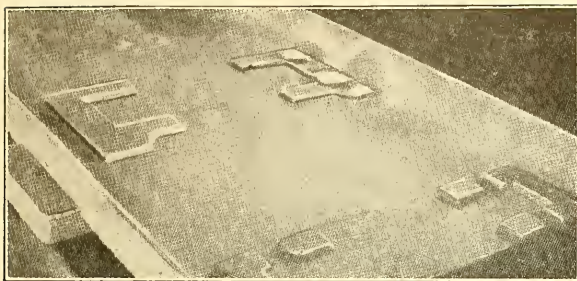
Welded Blowholes in Lathe Pan.
